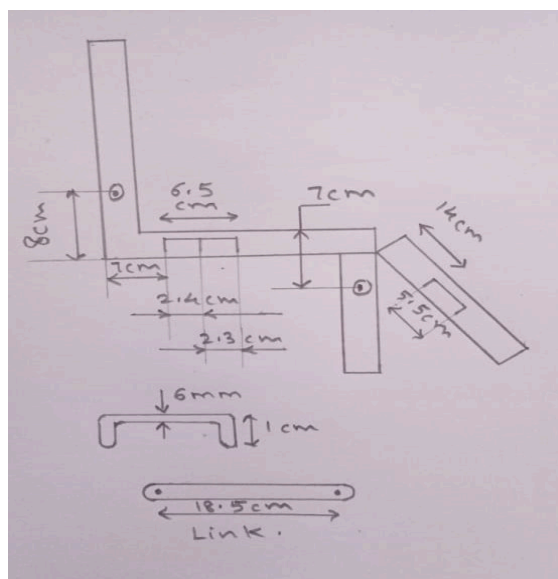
Dimensions of Links and Slots for setting wheelchair positions
